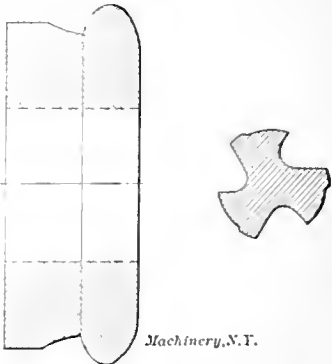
Fluting Cutter and Section of 15-16-inch Reamer-drill
